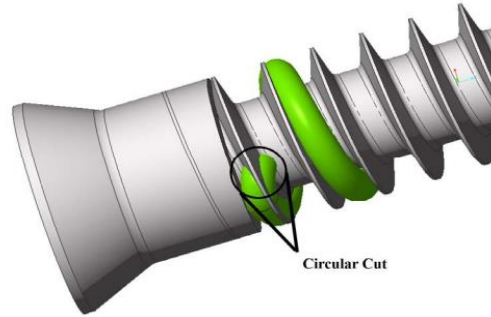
The SMA Helical Insert is Fused to the Holes on the Surface of the Screw
